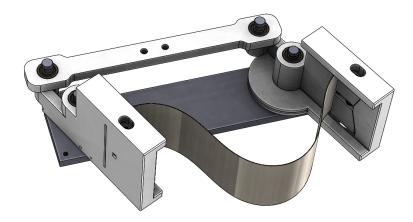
CAD model (solidworks) from prototype used for measurements. The spring can be substituted for a different plate spring.
